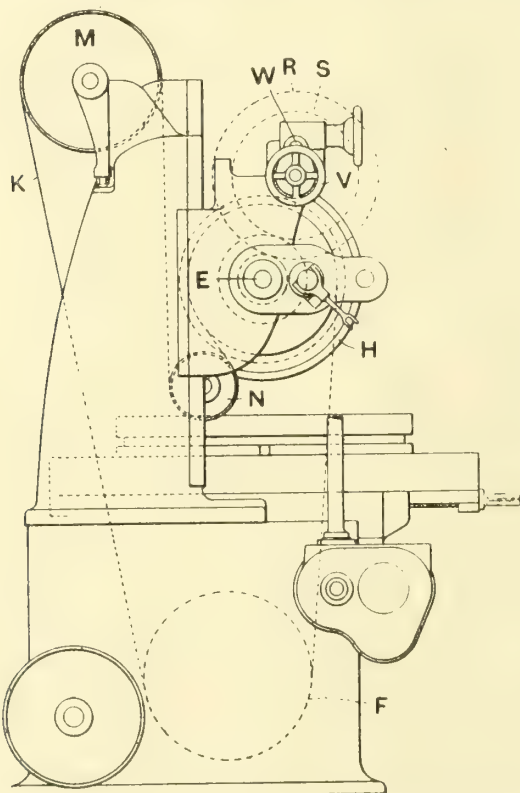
ALL GEAR DRIVE FOR BORING AND FACING MACHINES.
